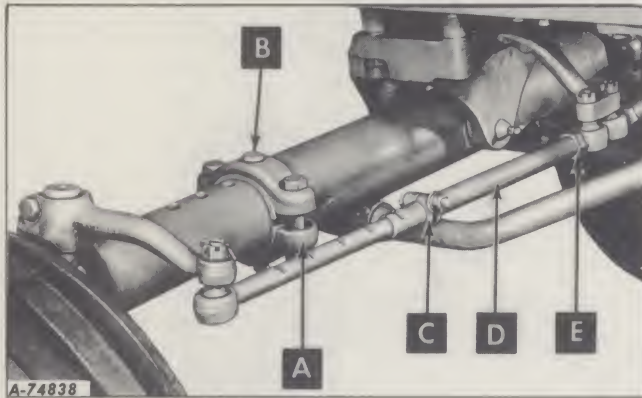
Front view showing adjustable wide-tread front axle.
